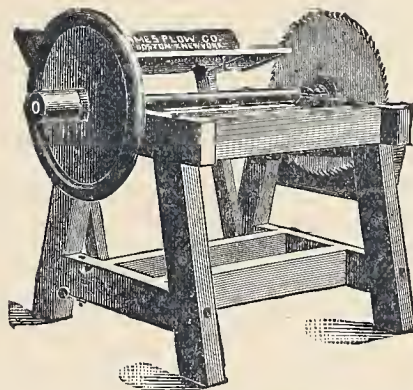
Portable Circular Saw Machine with Rocking Table.
